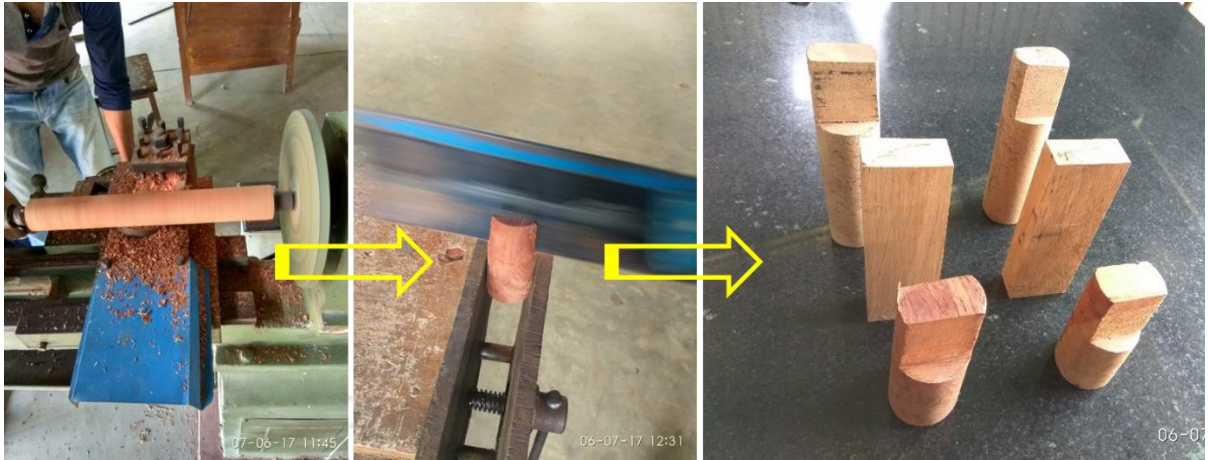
fabrication of wooden fixtures for fabricated bone plate mechanical testing
